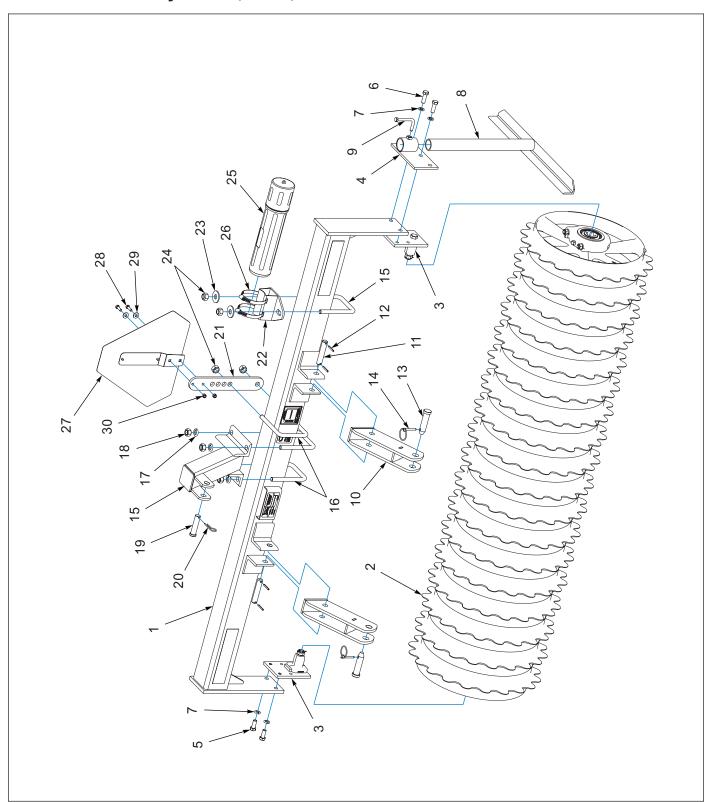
Frame Assembly - PP5, PP6, PP7
